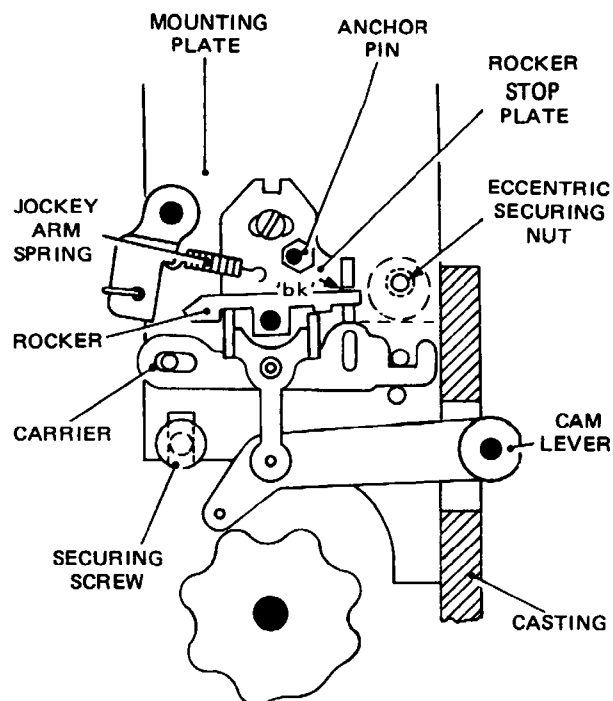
SWITCH MOUNTING PLATE (FRONT VIEW)
